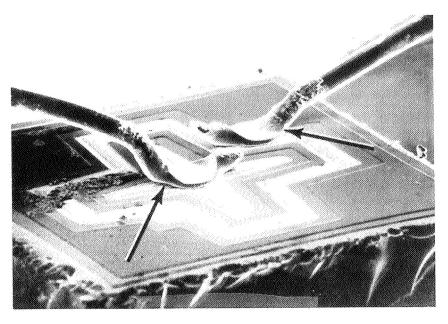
Manufacturer "A" 2N2222A, From Ignition Phase Timer, Typical T. C. Wedge Bond
